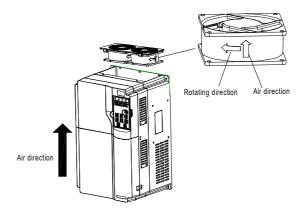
Fan maintenance for 1.5–7.5kW VFD models (disassembly with tools)
